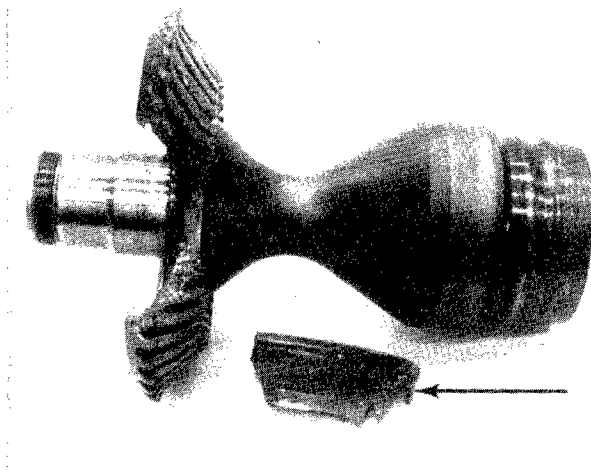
Optical Macrograph of the failed spiral bevel gear and the fractured eight-tooth segment (denoted by the arrow). Reduced 70%.
